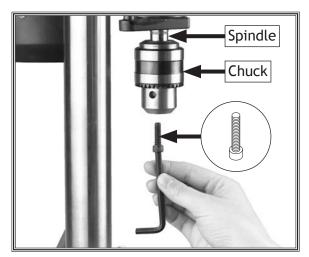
Installing chuck on spindle (chuck guard seat removed for clarity).
